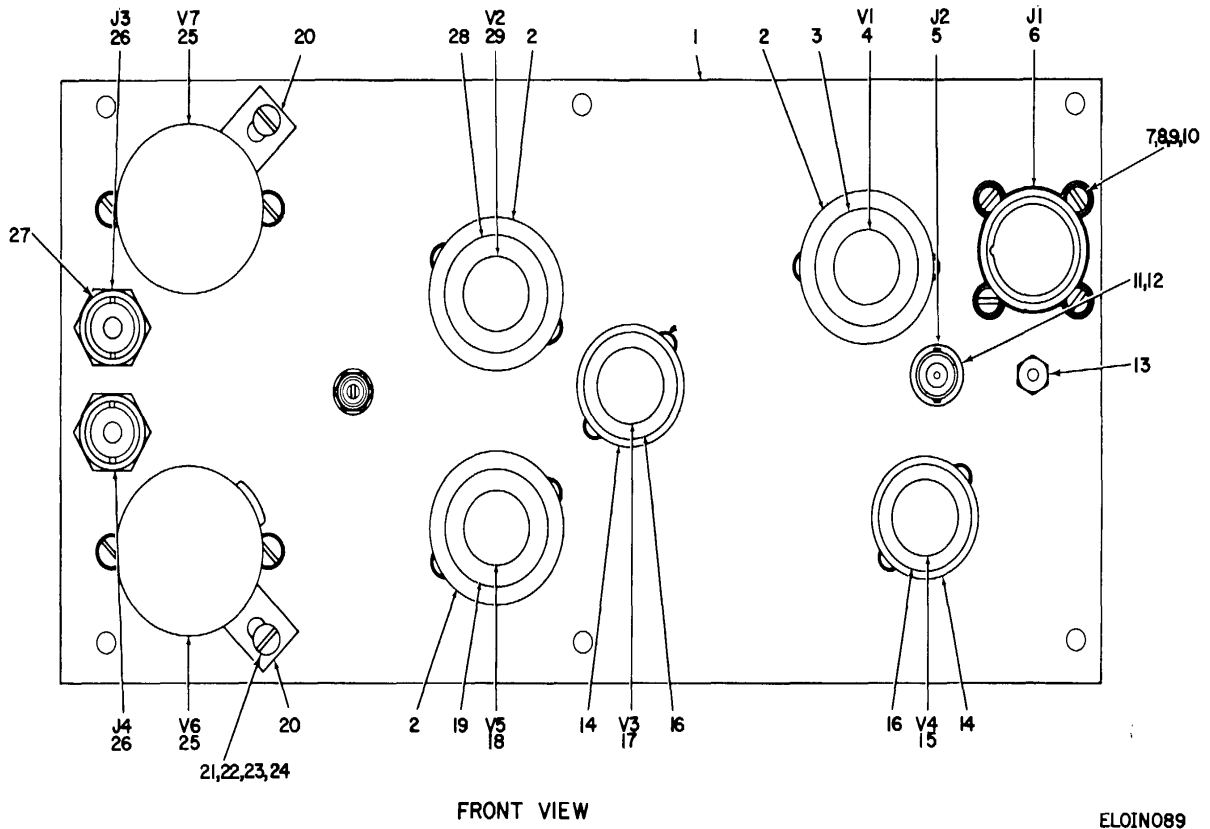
Control Indicator C-6988/TPN-18 Panel Assembly
